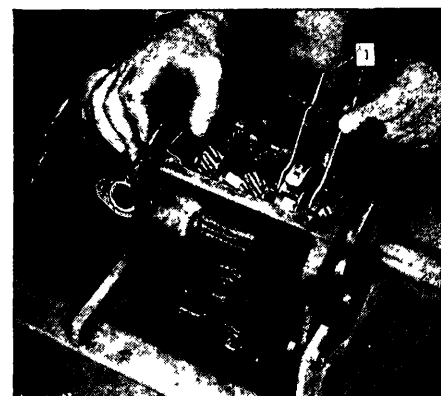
Gauging front friction ring clearance which should be .105". 1946-52 Series 40
